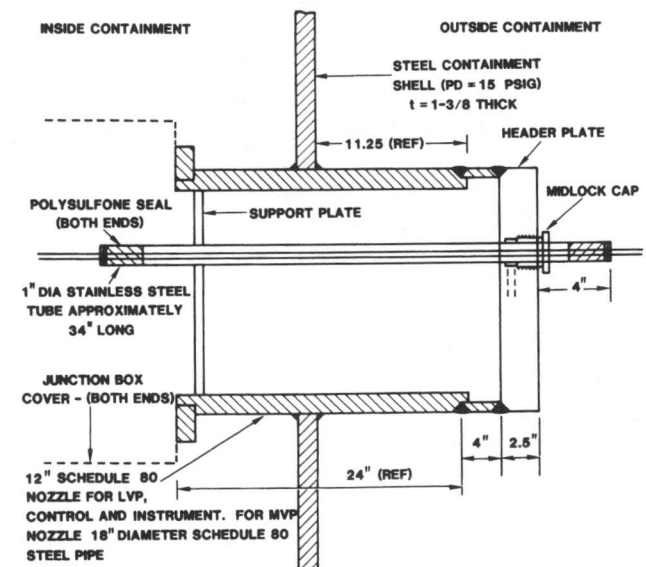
Watts Bar 1 and 2 – Electrical Penetration Assembly (Conax)
